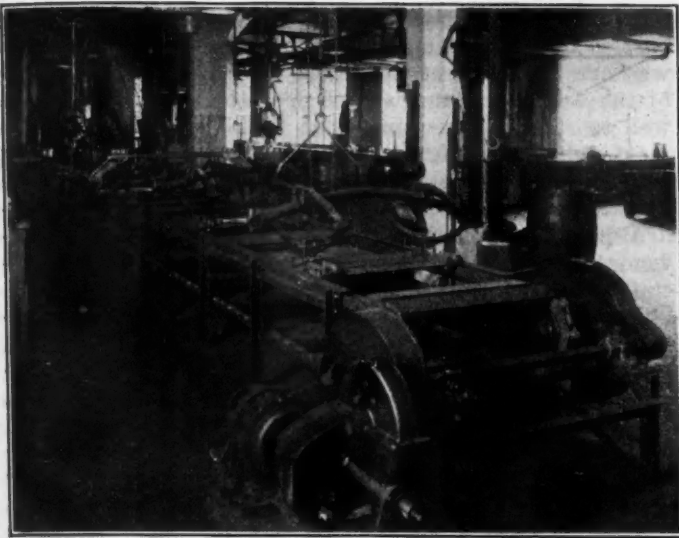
FRONT-AXLE ASSEMBLY CONVEYOR
